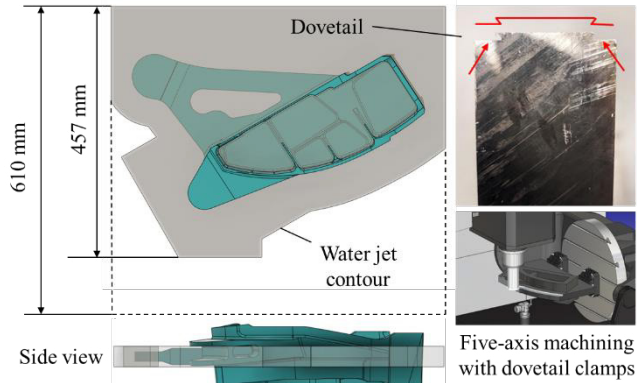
Excess material removal by water jet and dovetail for work holding during five-axis machining.
